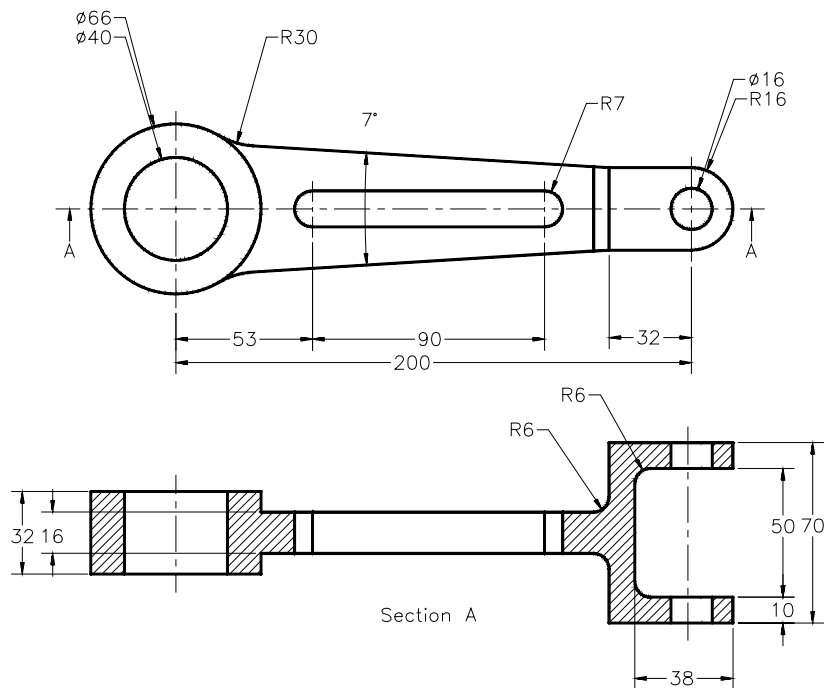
Views and dimensions of the Clutch Lever for Exercise 1
